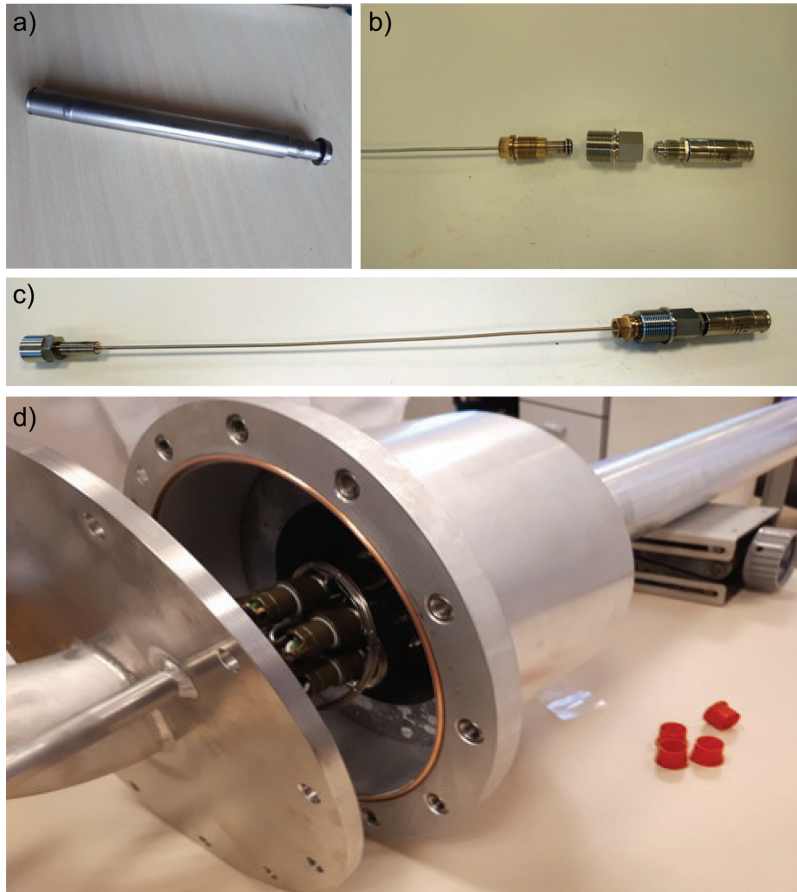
SAGA assembly components: (a) salt capsule first containment, (b) pressure sensor connection to salt capsule through a minitube, (c) minitube assembly, and (d) assembled SAGA capsule array inserted into third containment.
